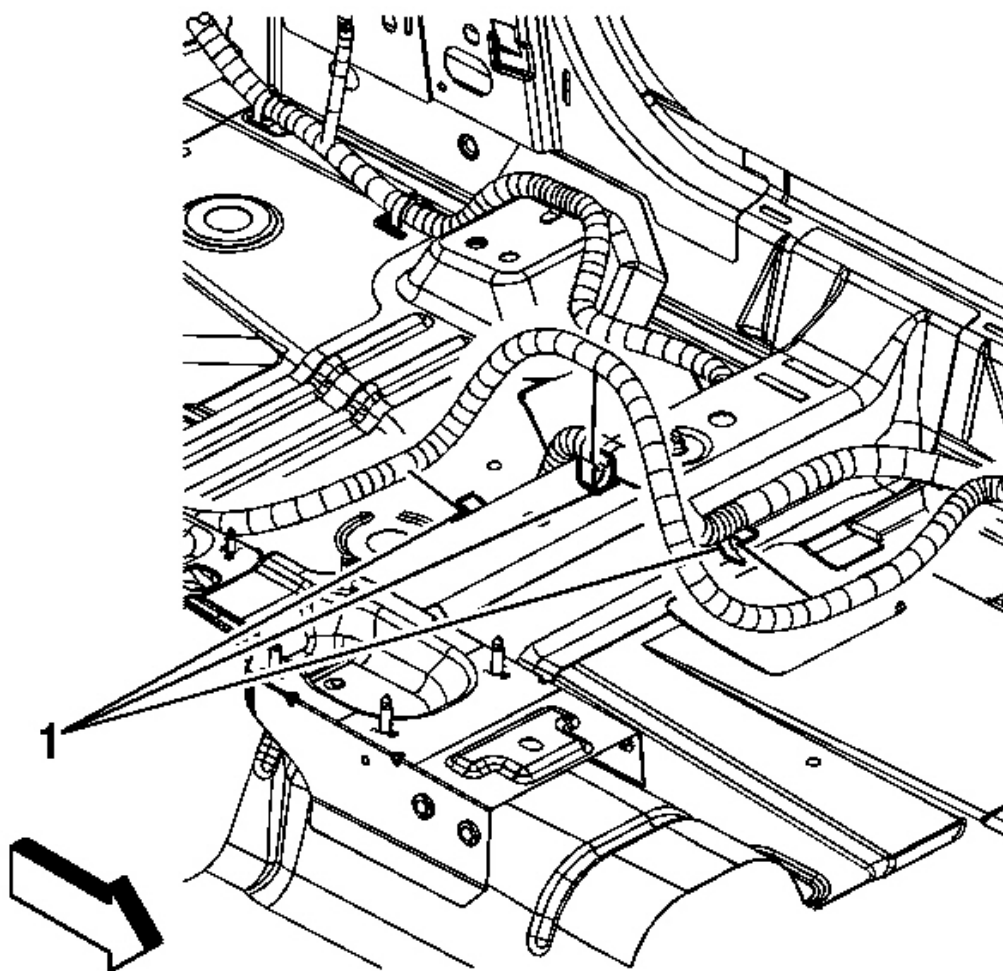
View Of Positive Battery Cable To Body Wiring Harness Clips
